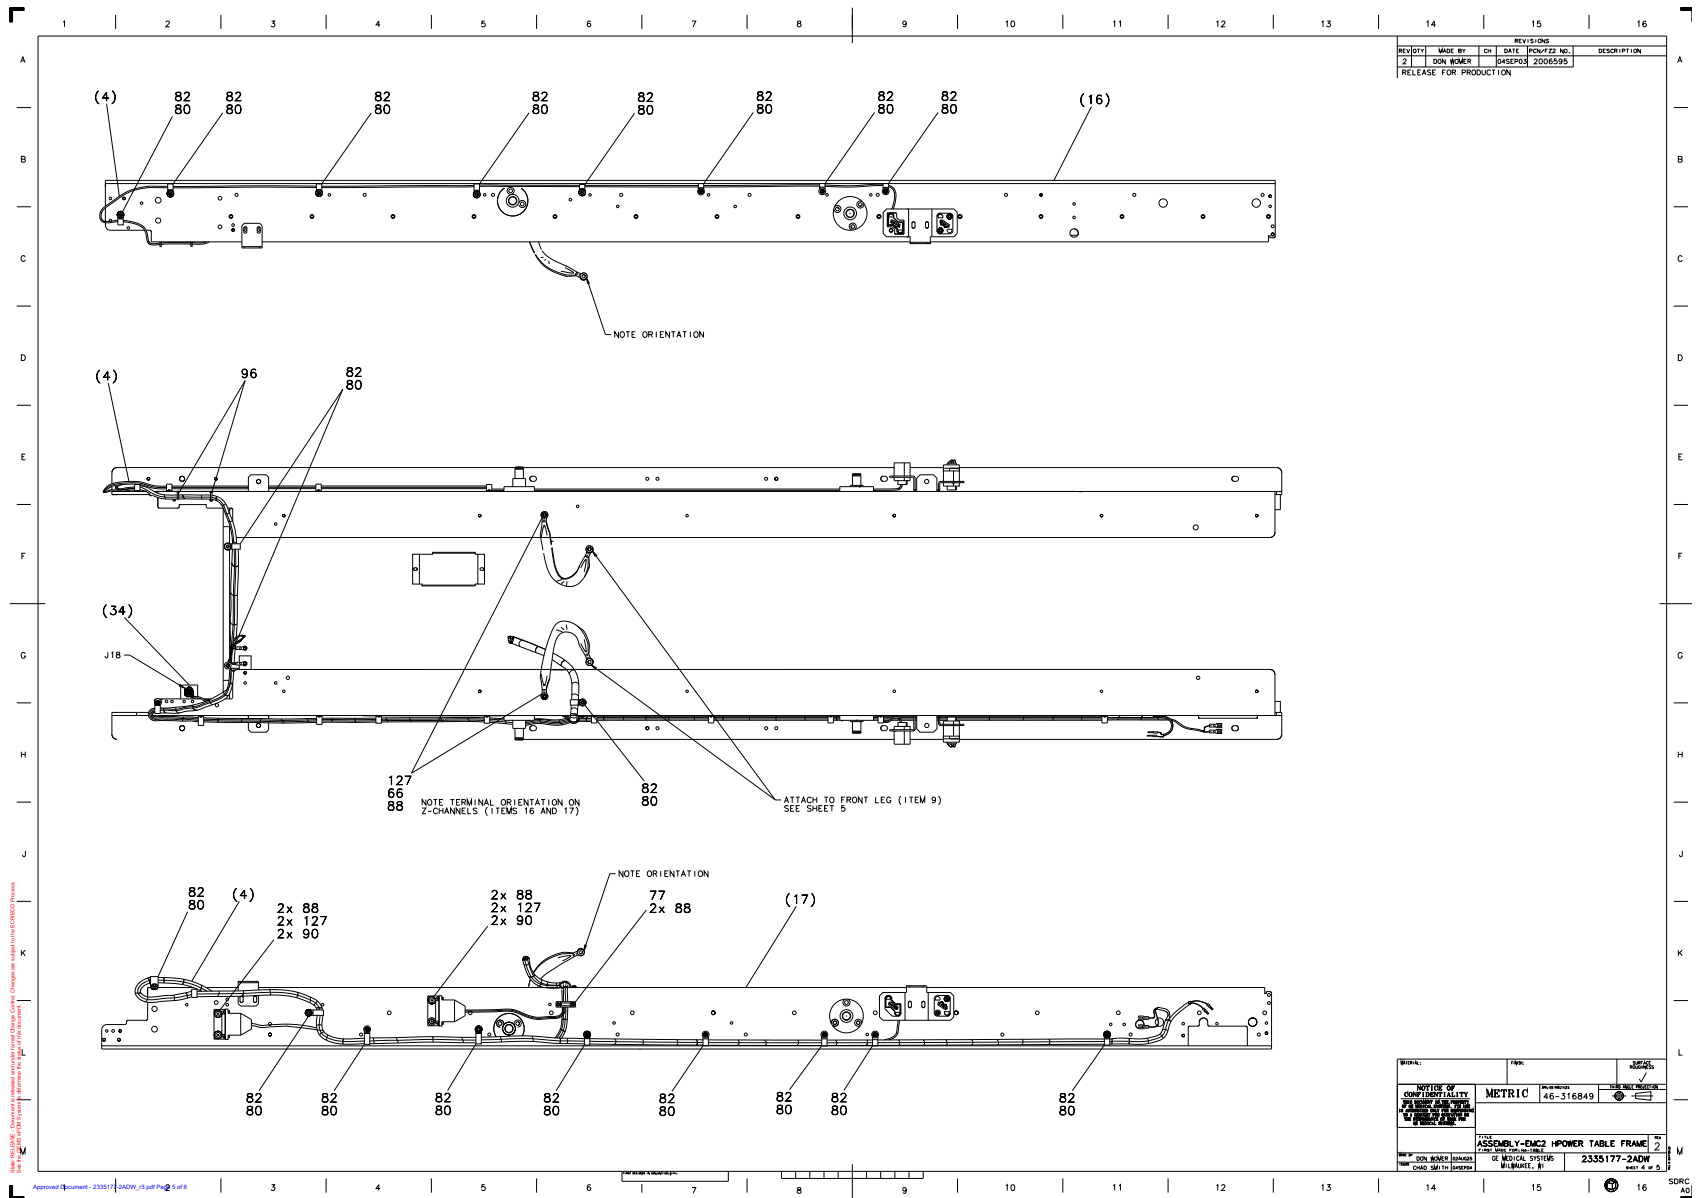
Table Frame Assembly (2335177-2, sheet 4, rev 2)
